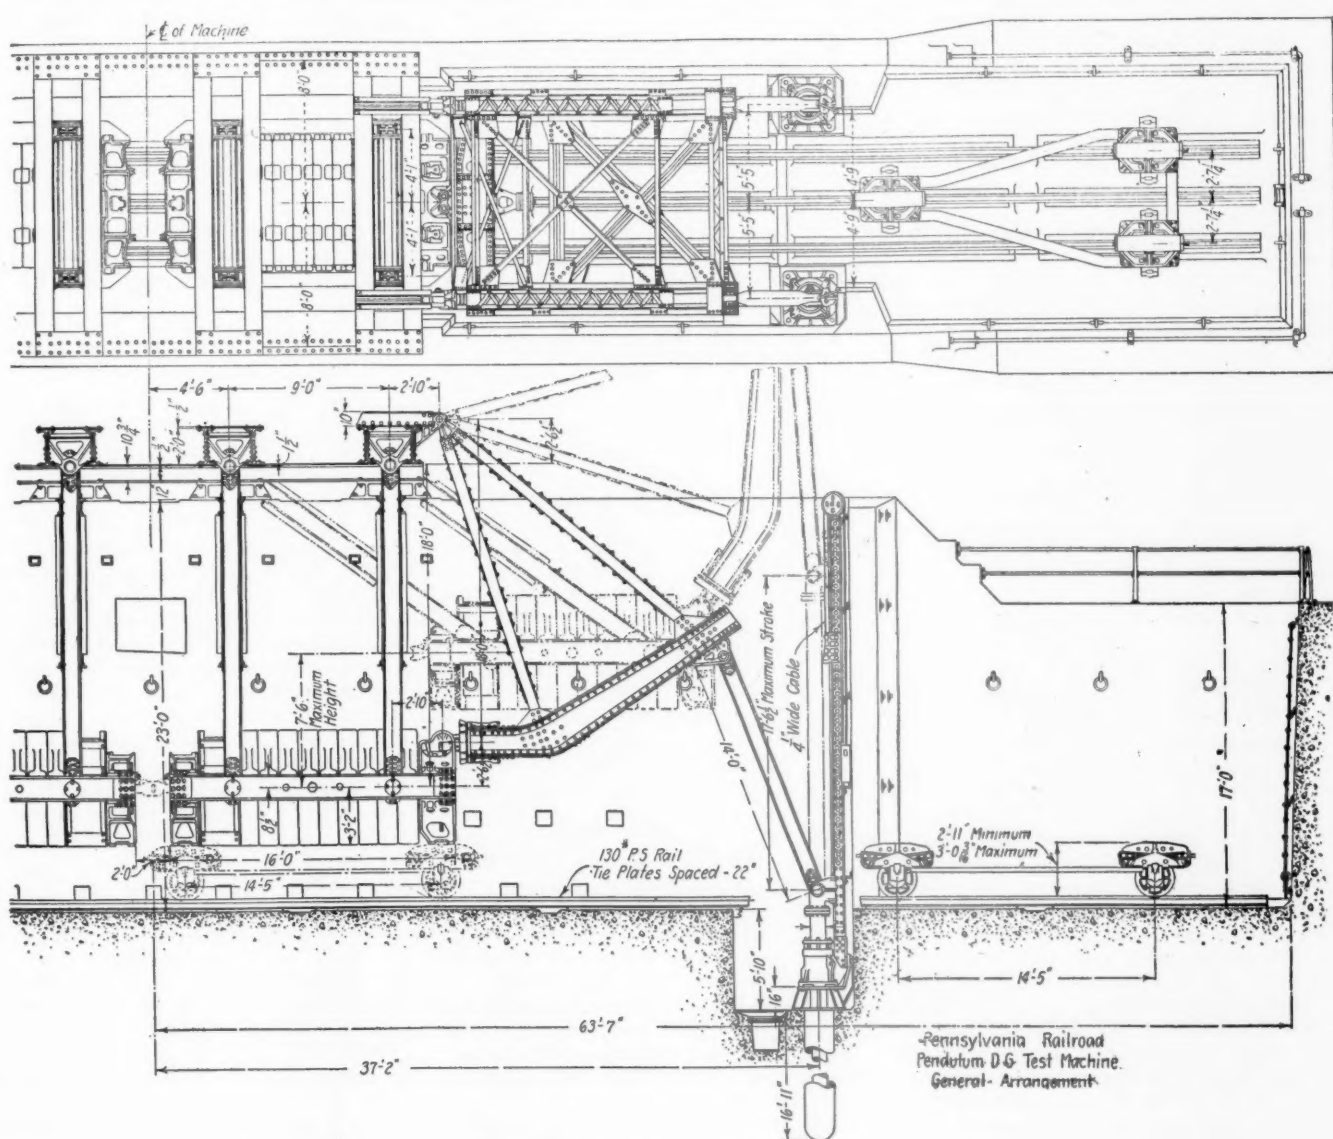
Exhibit A.—General Arrangement of Pennsylvania Draft Gear Testing Machine
